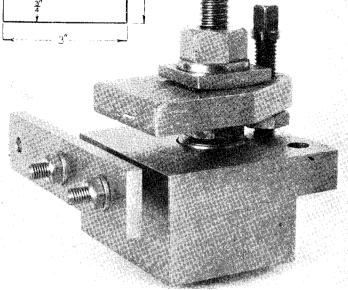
The attachment parts: "A"—the base; "B"—the pressure-screw; "C"—the work fence
